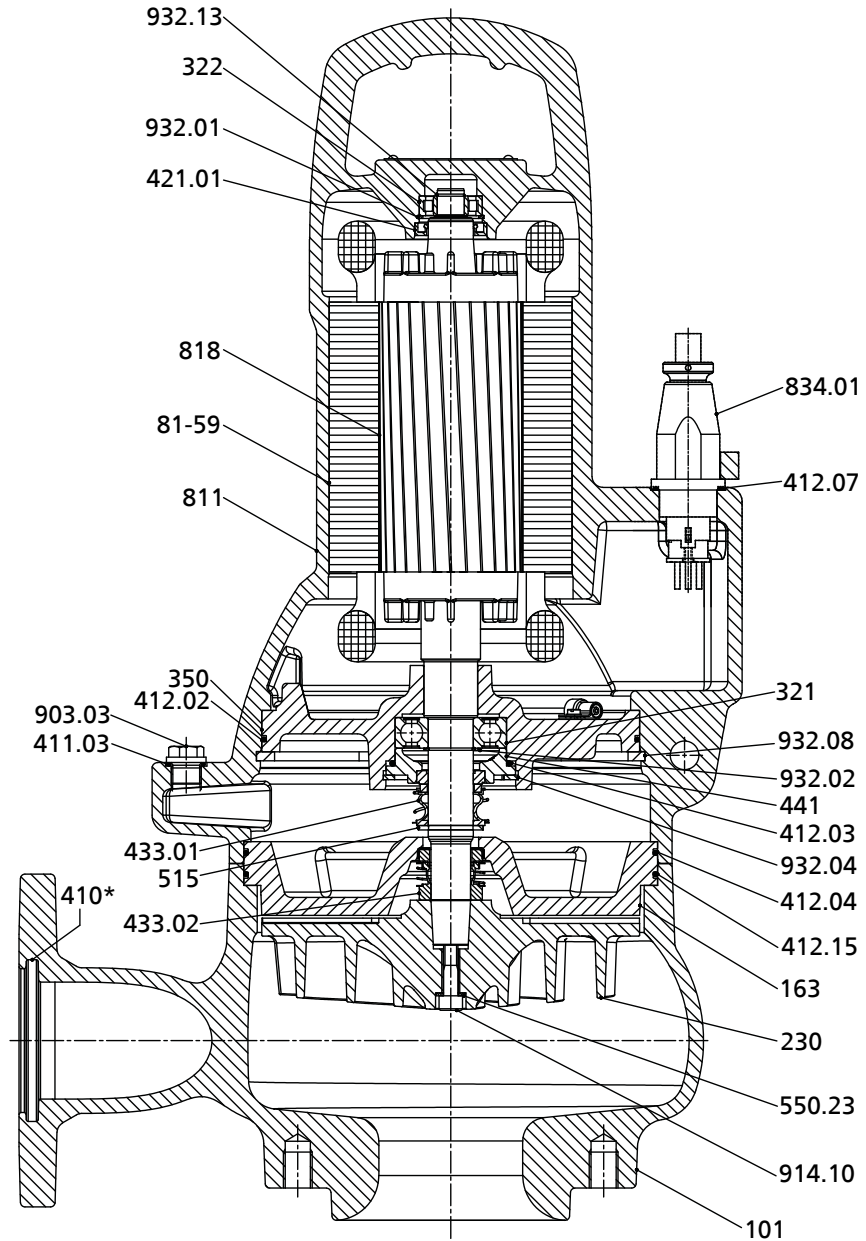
General assembly drawing Amarex KRT, motor type 1
